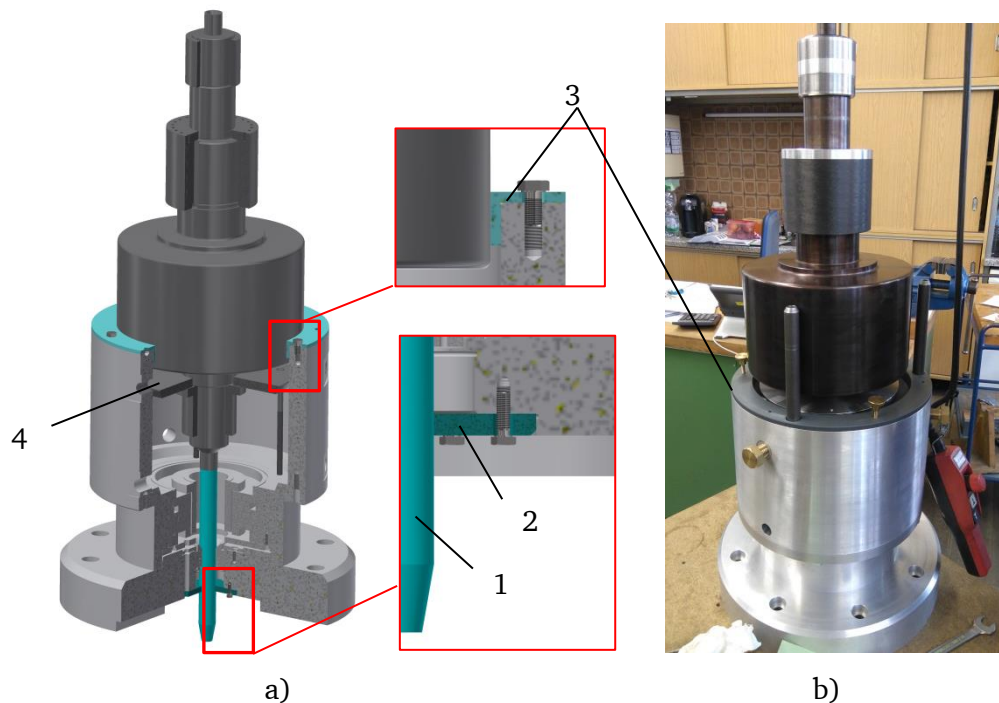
System assembly course, step 1: assembly of the rotor to bottom housing, 1-guiding rod, 2-guiding plate, 3-guiding sleeve, 4-C-shape end plate belonging to combined magnetic bearing (stator part): a) *Autodesk Inventor 2018* [47], b) prototype
